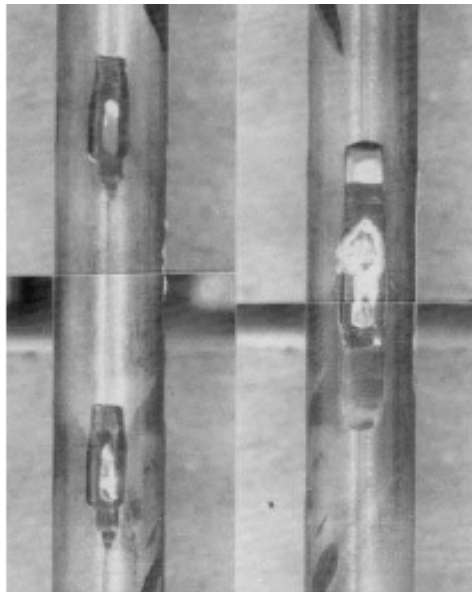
Example of the fuel failure due to grid-to-rod fretting
